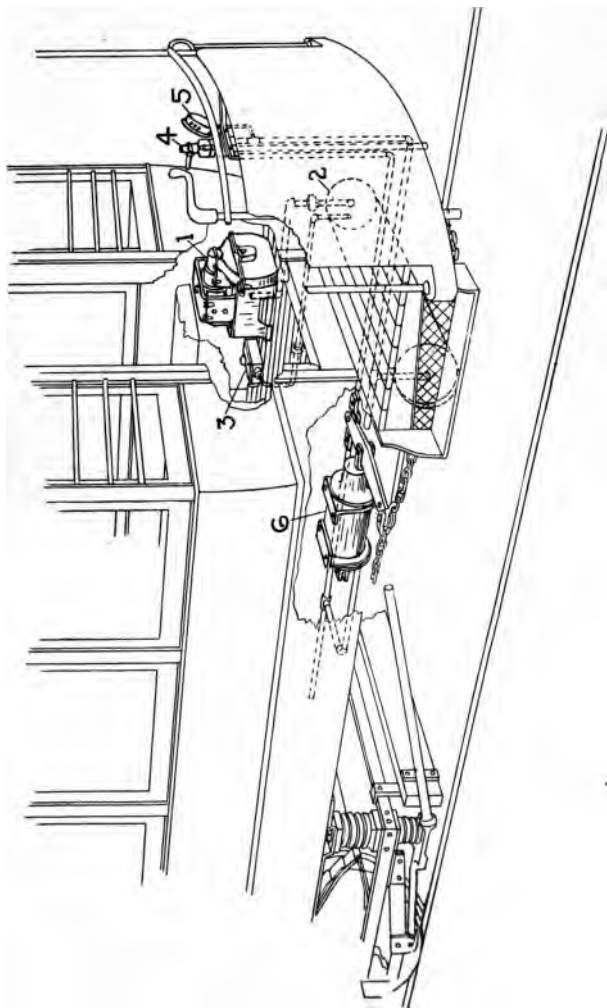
Single Truck Car Equipment with A-2 Compressor
